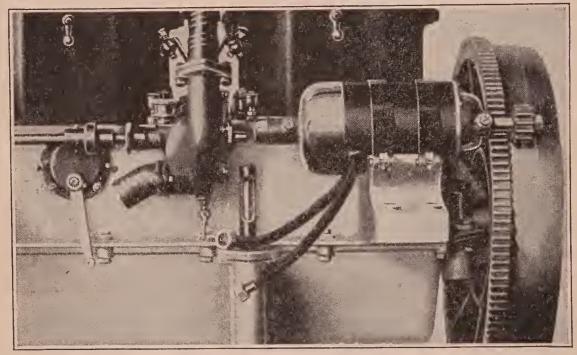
Mounting of Bosch-Rushmore Starting Motor
